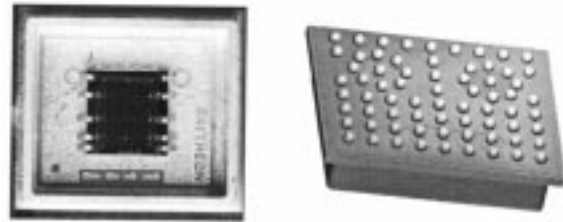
Picture of packaged assembly and pictorial representation of the backside.
